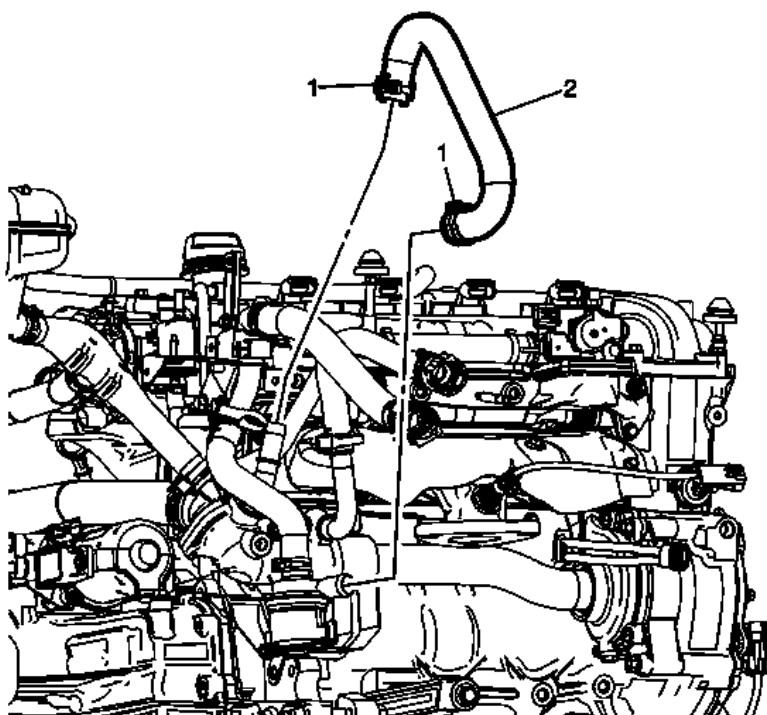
Generator Control Module Coolant Pump Hose & Clamps
